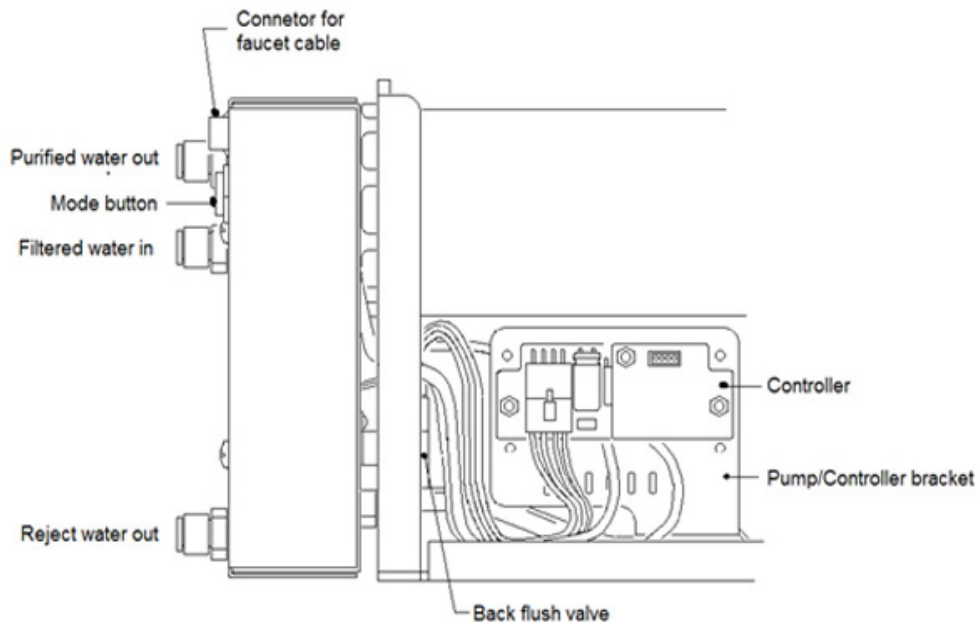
Left hand partial side view of unit with the outer cover removed
